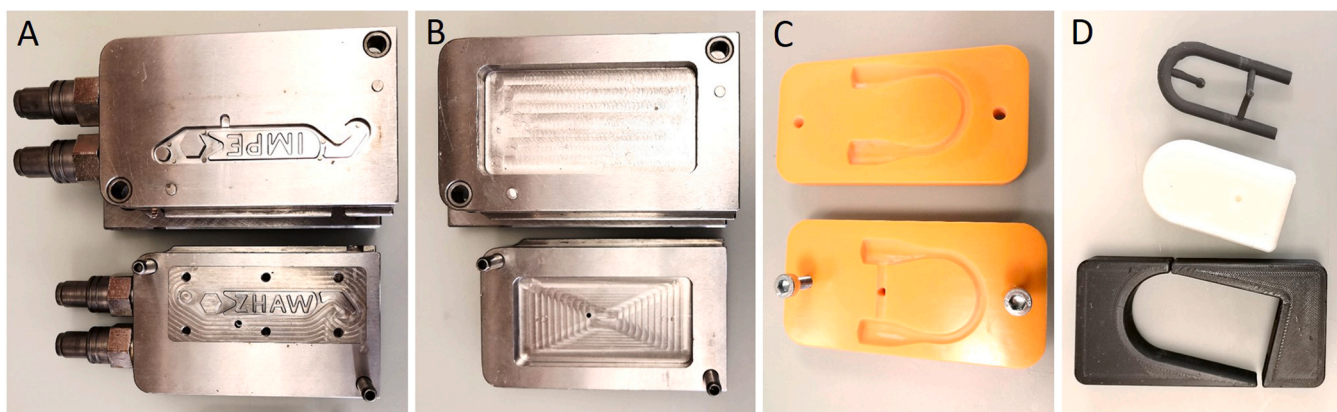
Steel mold (A). Steel adapter with cavities on both sides that can hold the 3D printed mold (B). Resin mold 3D printed by DLP (C). Injection molded part after dissolving the sacrificial mold (D, top), the sacrificial mold itself (D, center) and an adapter piece to fit the sacrificial mold into the steel adapter (D, bottom).
